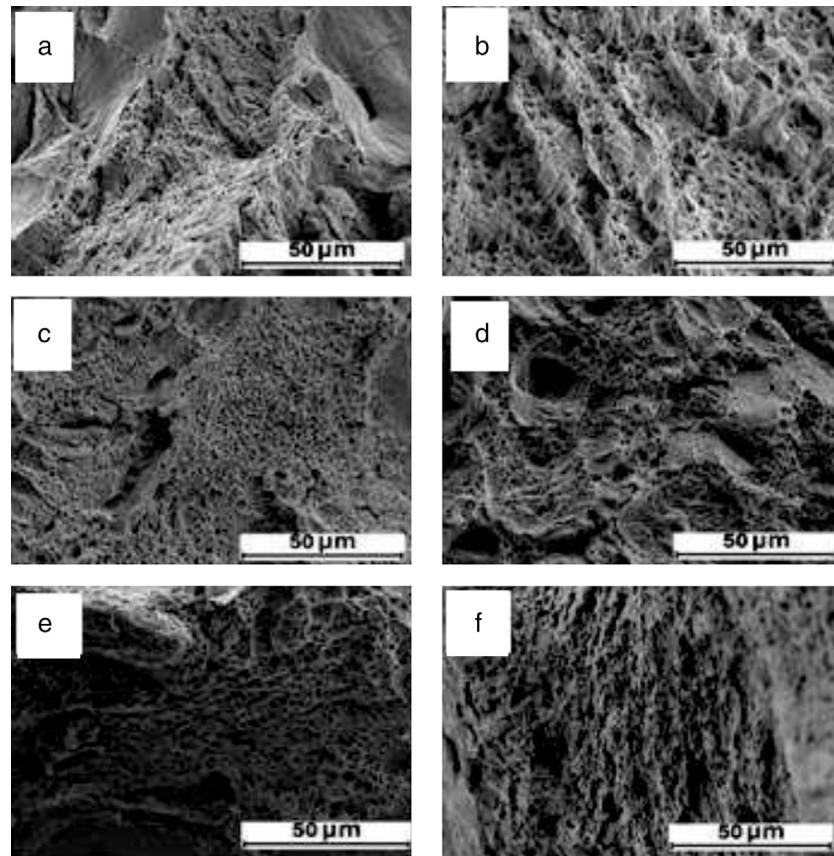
Fractographs of tensile (a–c) and impact specimens (d–f) of ferritic stainless steel weldments in post-weld annealed condition. (a) 1 g Cu (0.1 wt.%) addition; (b) 2 g Cu (0.18 wt.%) addition; (c) 3 g Cu (0.25 wt.%) addition; (d) 1 g Cu (0.1 wt.%) addition; (e) 2 g Cu (0.18 wt.%) addition; (f) 3 g Cu (0.25 wt.%) addition.
